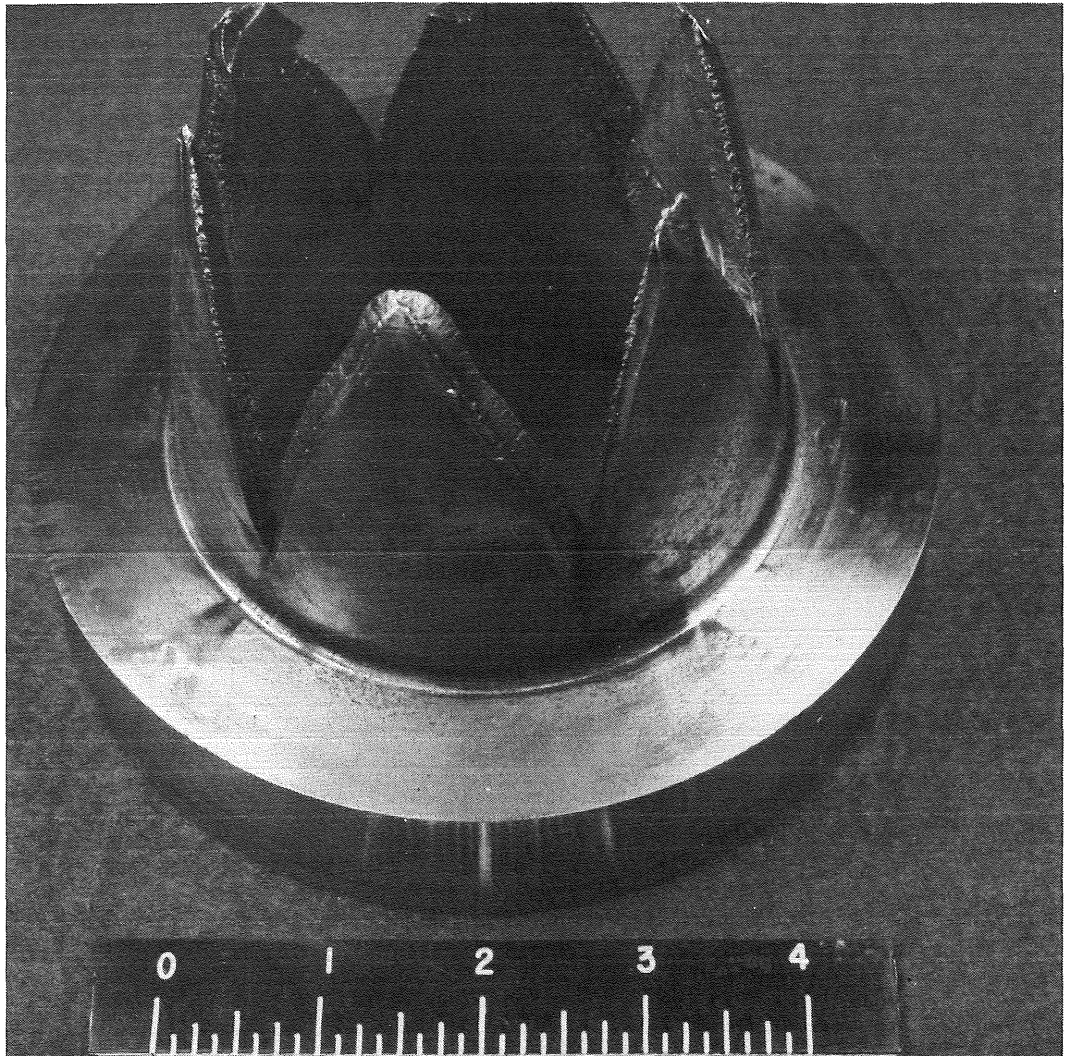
Posttest photo of shaped diaphragm, Test No. 9, 4,560 bars.
